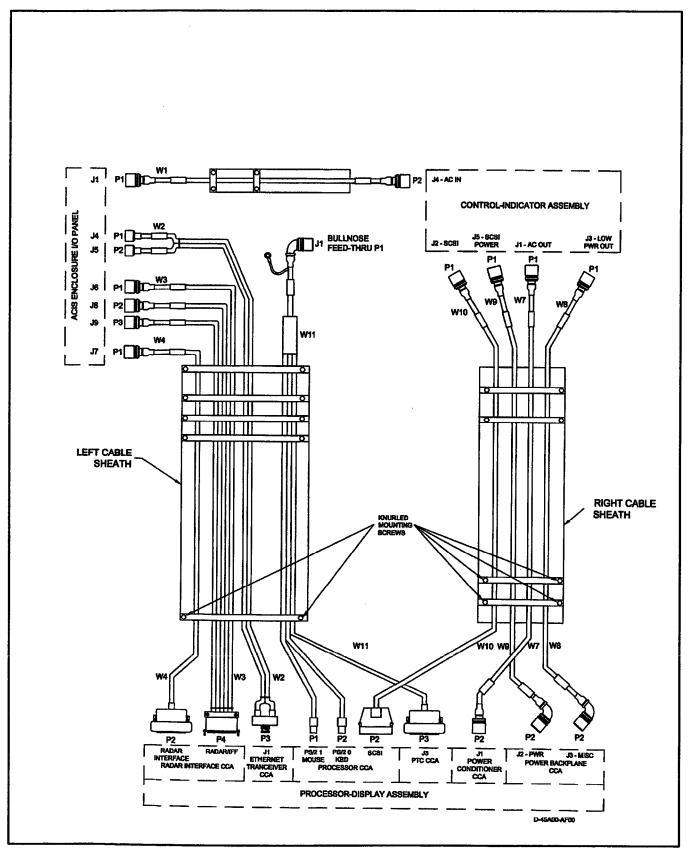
ACIS Subassembly Interconnection And Cable Sheath Layout
